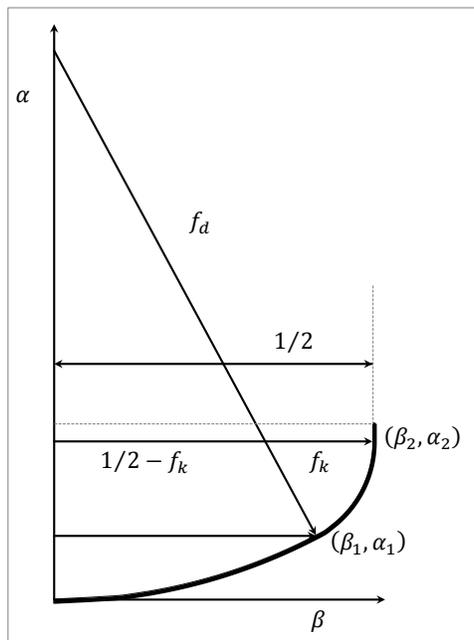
Cross-sectional view of a torispherical head showing dimensionless parameters
